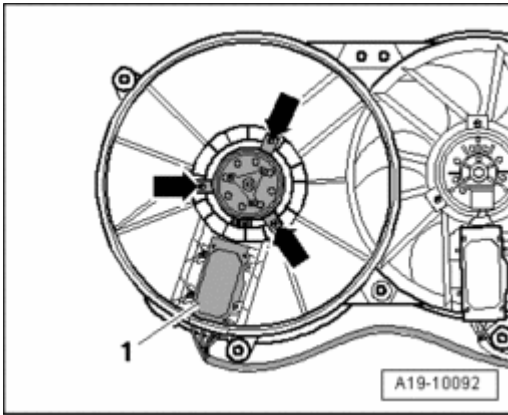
Removing Bolts, Unclipping Coolant Fan Control (FC) Control Module J293 And Removing Coolant Fan And Coolant Fan Control Module
